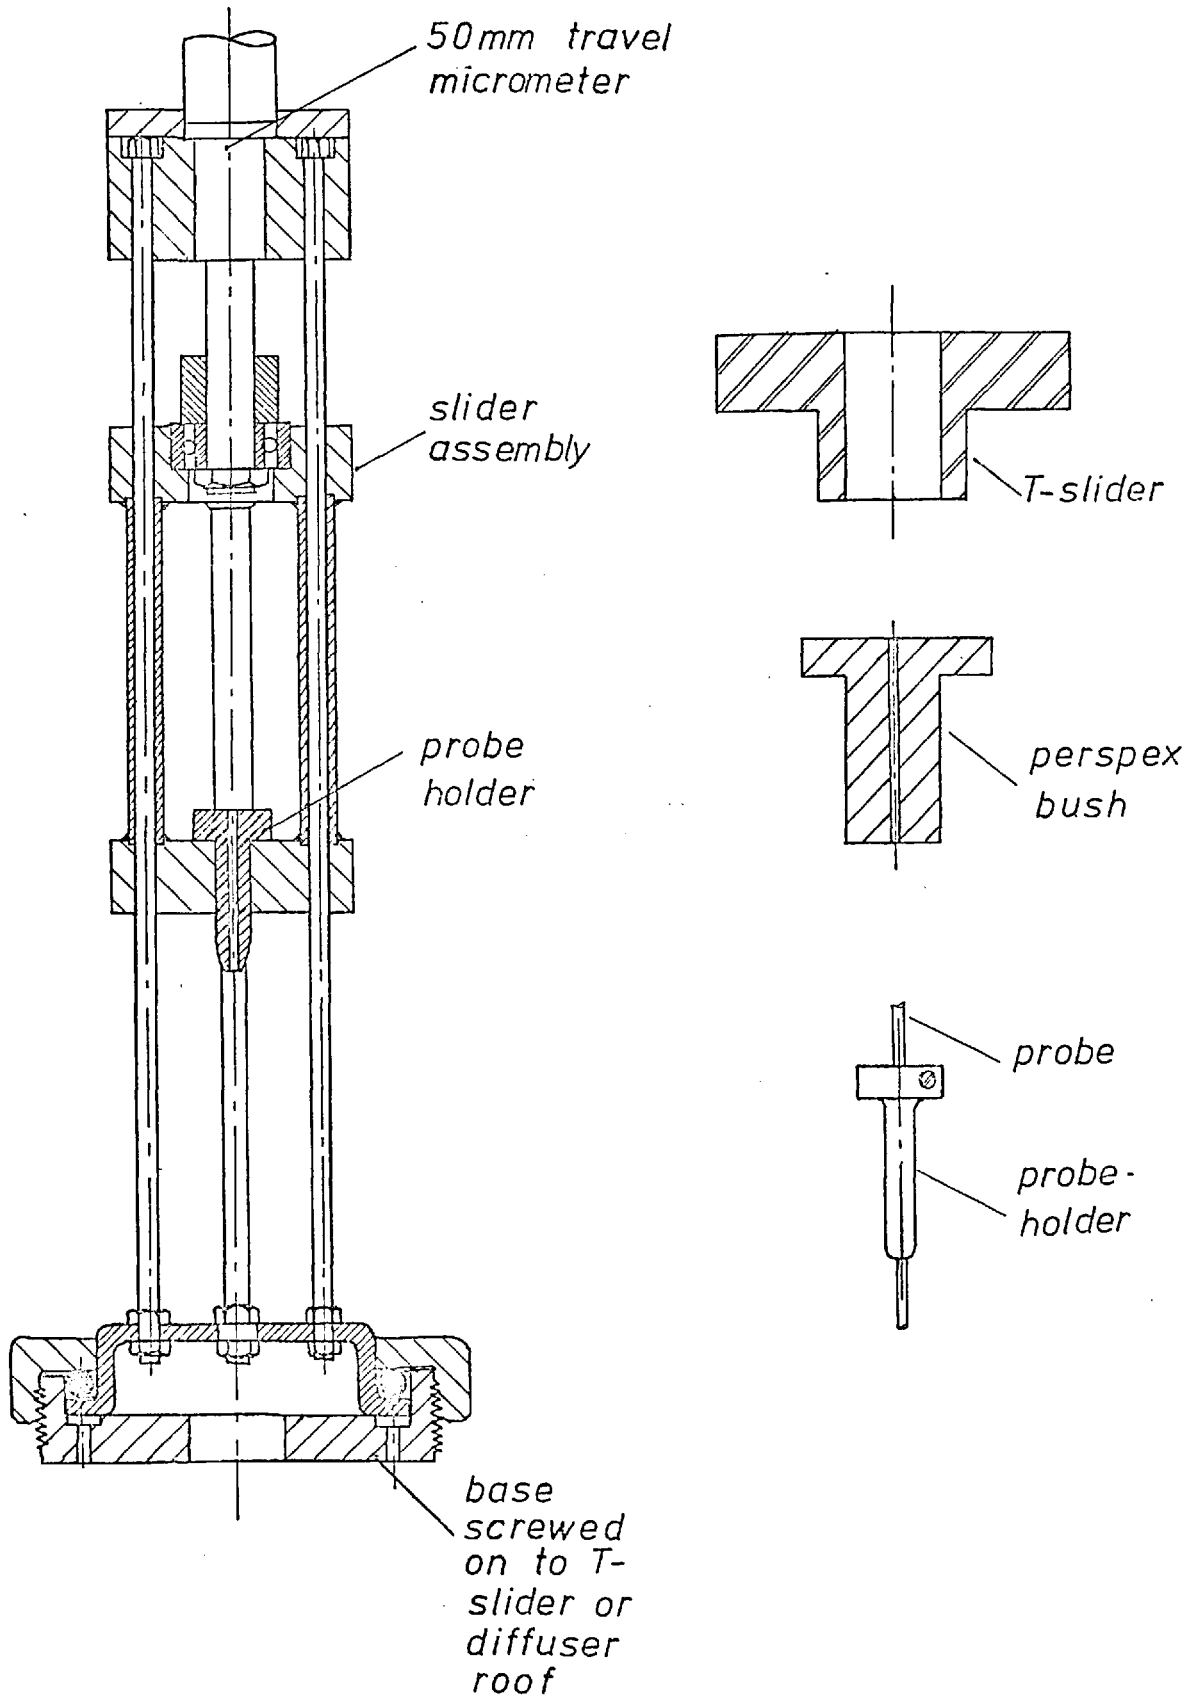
Assembly showing details of probe-traversing gear.
